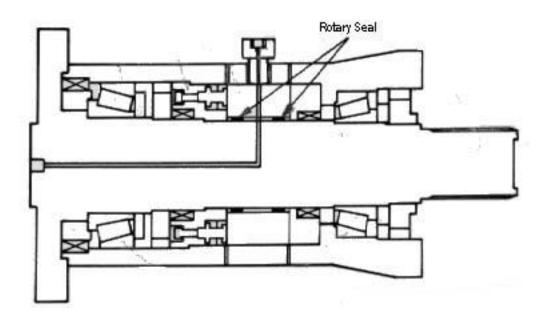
Section Through MK2A Cutting Head Shaft Assembly
